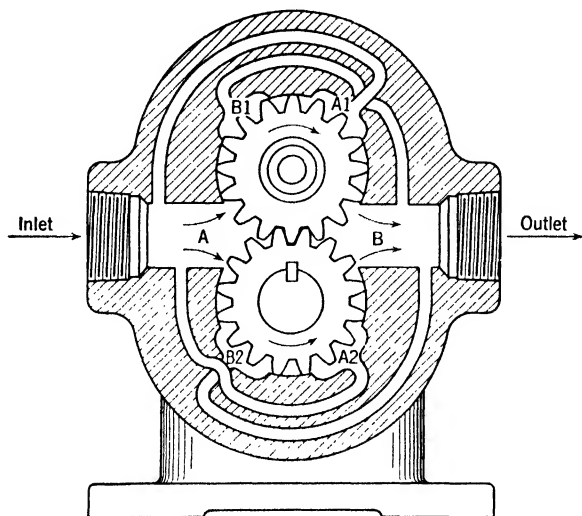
Hydraulically balanced gear pump. (Courtesy of Vickers Incorporated.)
